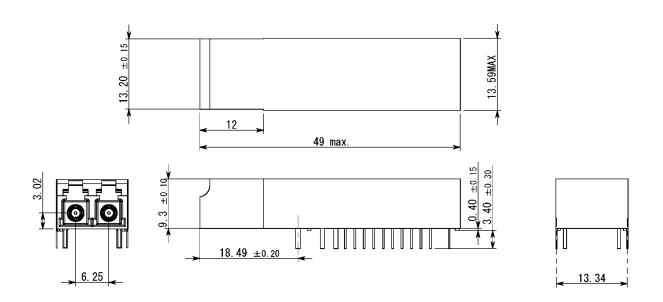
Outline Dimensions(SCM6012-GL-ZN/ZW)
